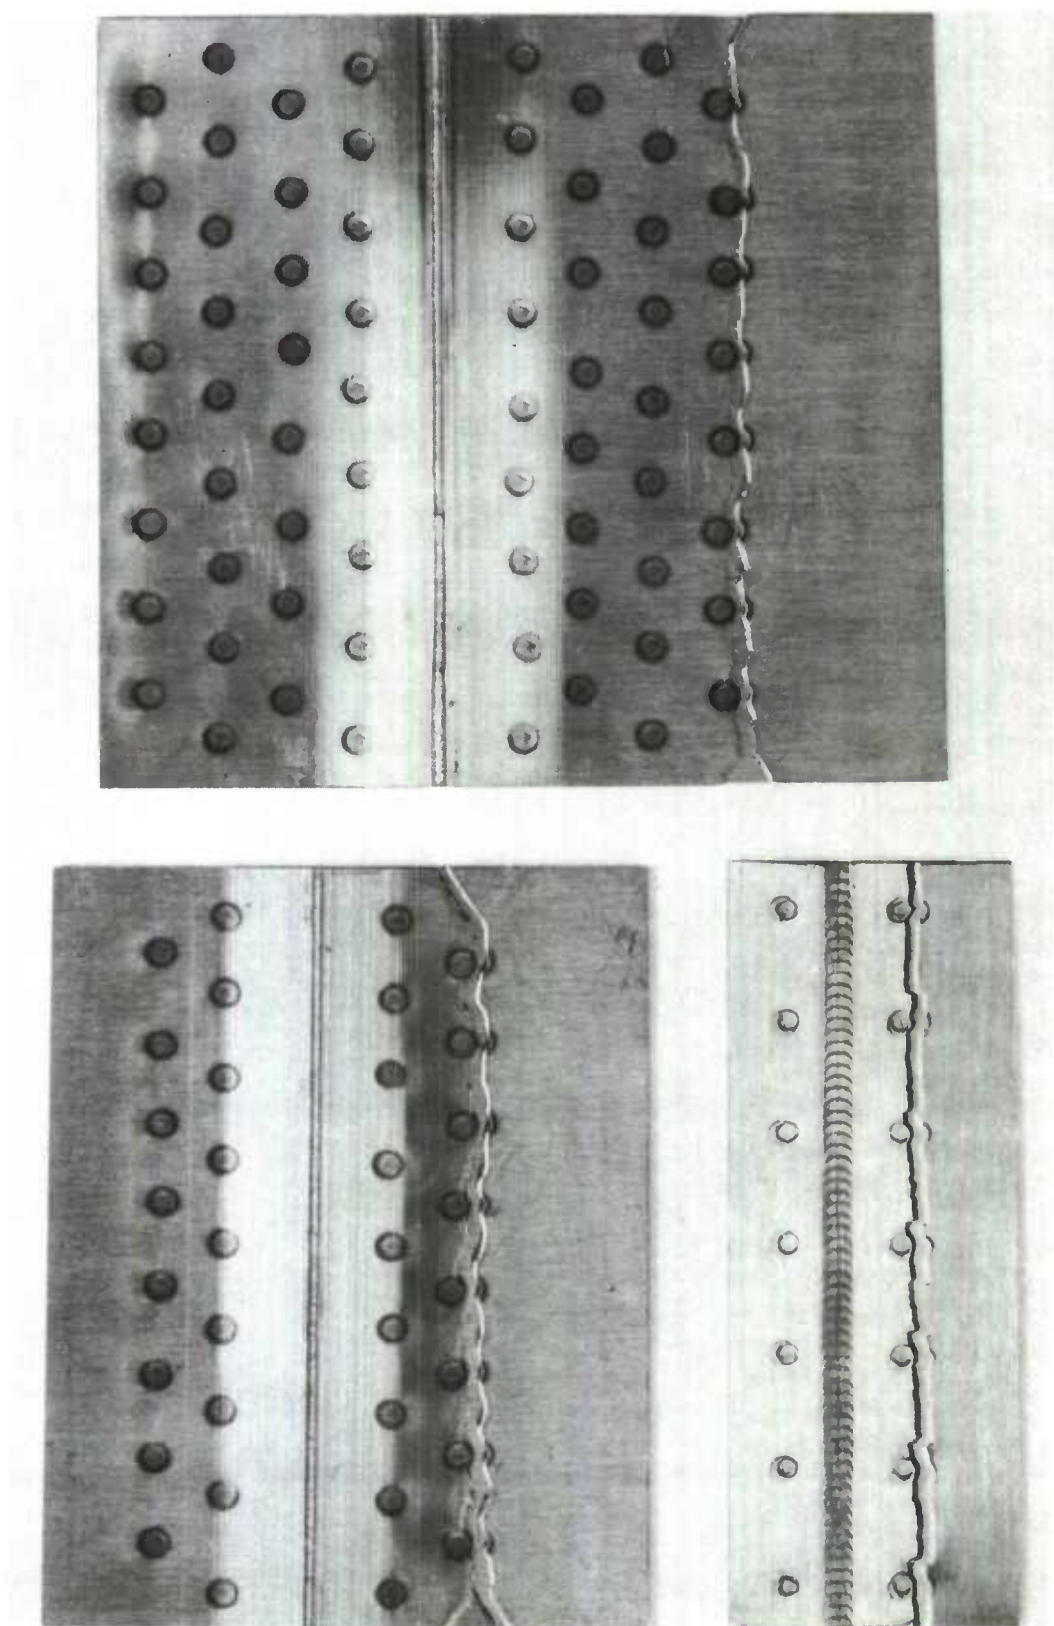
Fractured Fatigue Specimens - 301 SS (78°F)
